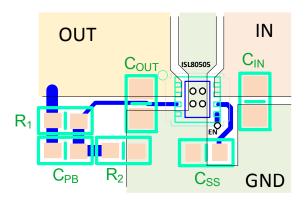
EXAMPLE FOR PCB LAYOUT
